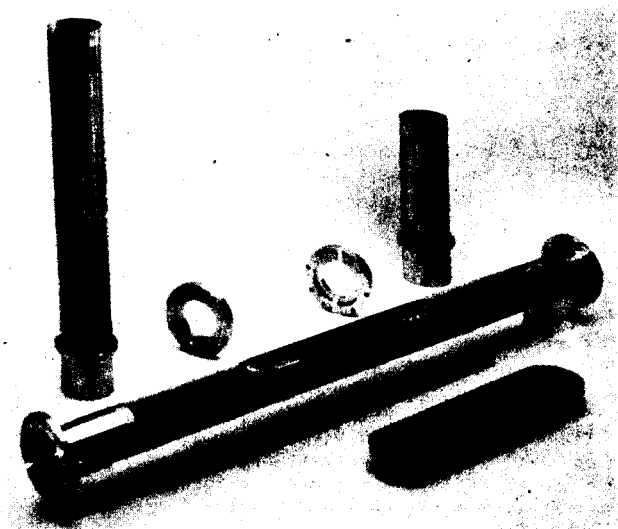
Pre-assembly view of the concentric heat pipe oven with mesh welded to outer surface of inner cell. Below is the flanged fitting. Above, the severed outer tube prior to welding is shown.
